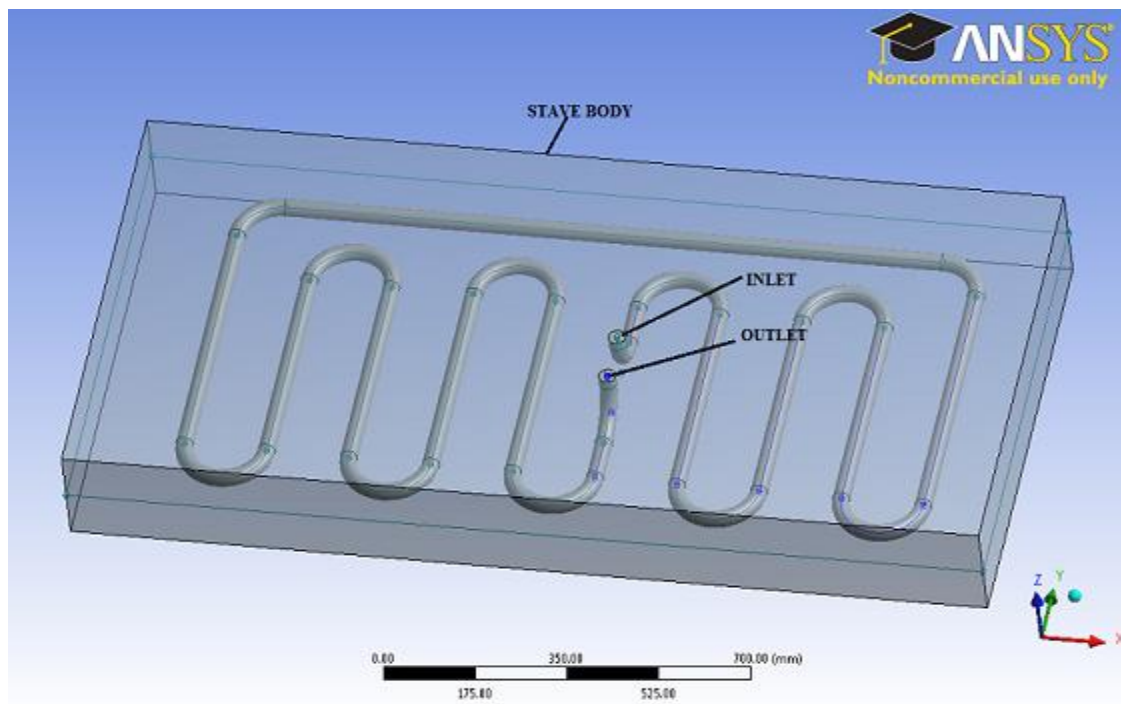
Three Dimensional Stave cooler of Blast Furnace
